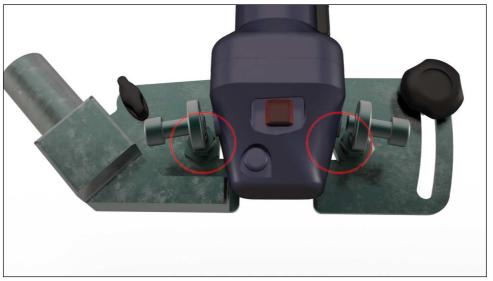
Two adjustable screws based on grinder dimensions. Adjust and tighten the bolts only if the grinder is not the Bosch GWS 7-115 type.
